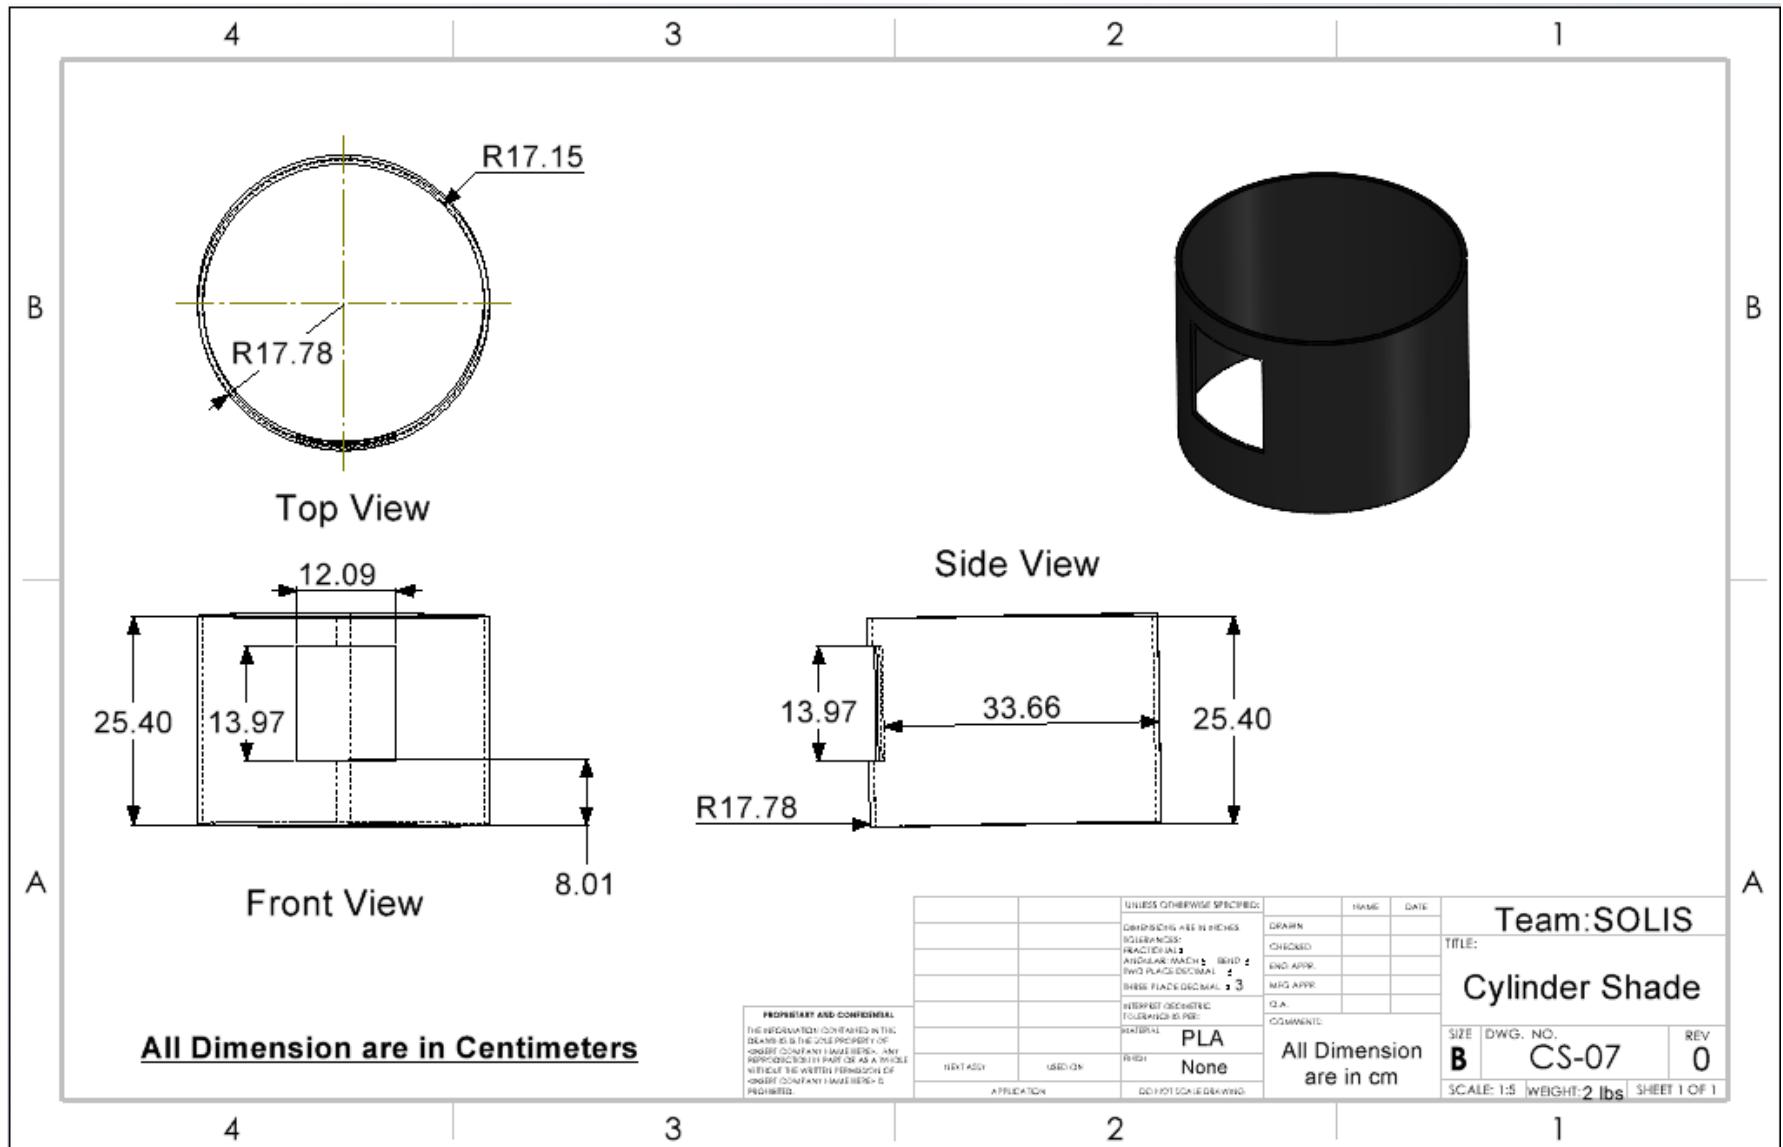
CAD Draft Sheet of the Cylinder Shade.
